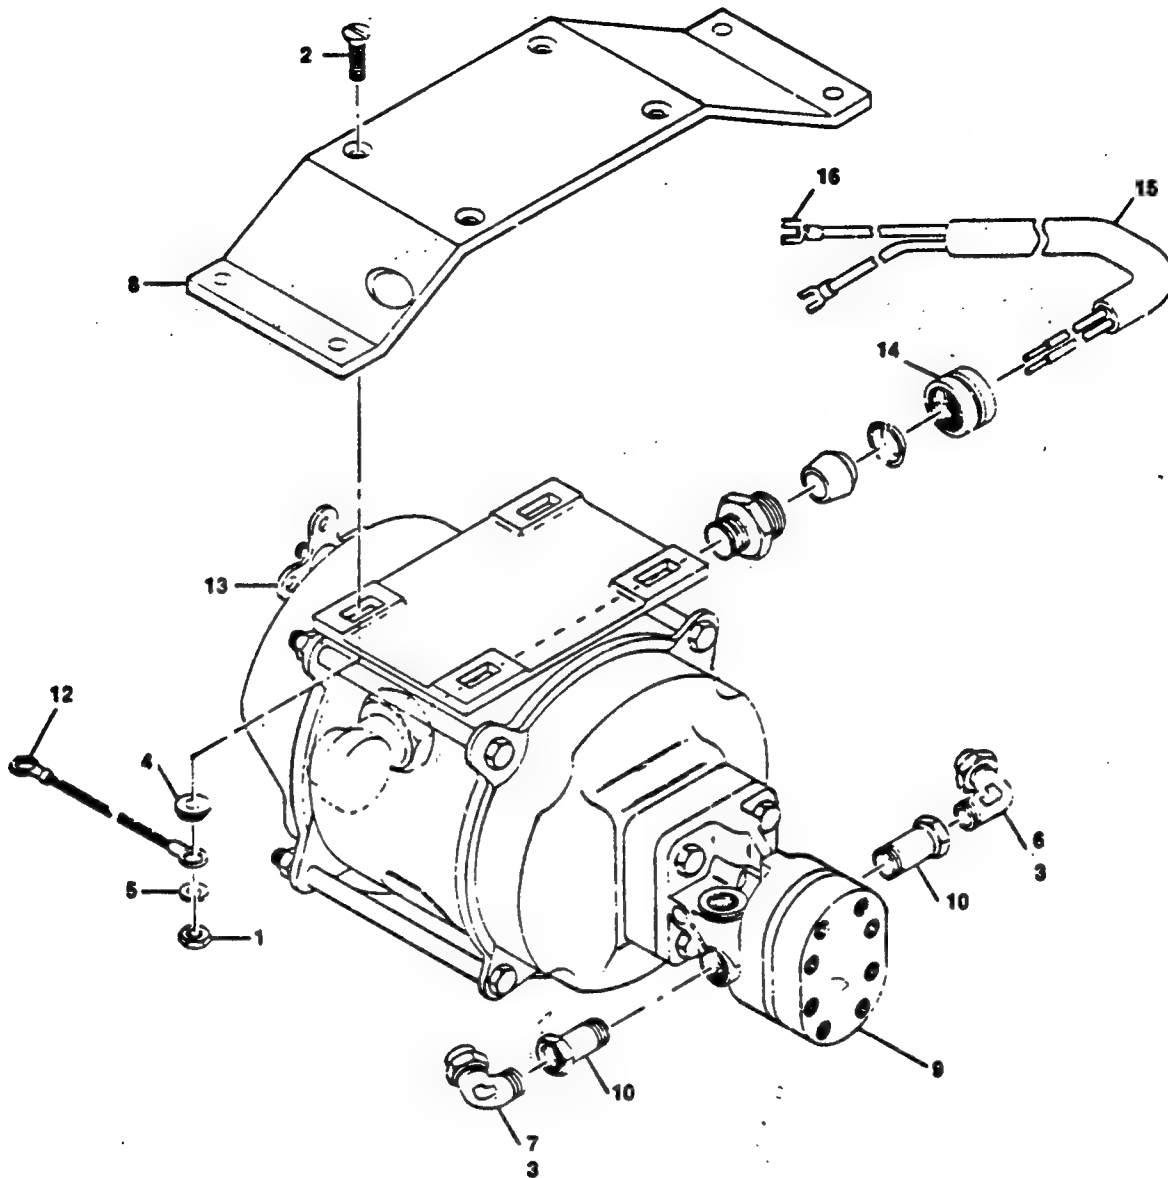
2080RC AND 2080 COMPAT IV MOTOR AND PUMP ASSEMBLY.
